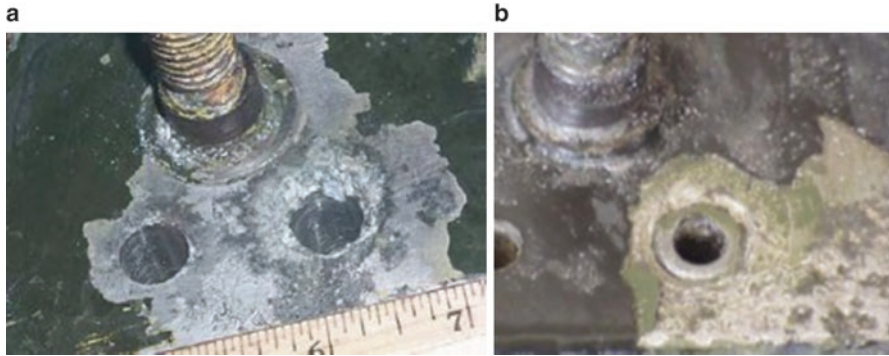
Corrosion around a stud and hole (a) and around an insert (b) on a helicopter magnesium gearbox housing (Courtesy Robert Kestler, FRC-E)
